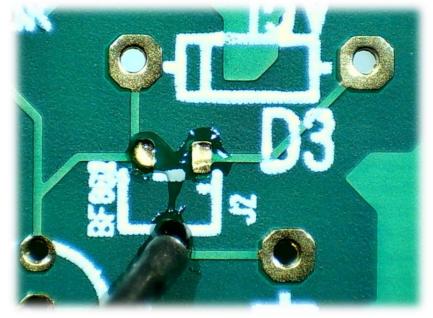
Soldering SMD FET, applying the solder flux (Rev06 picture)
